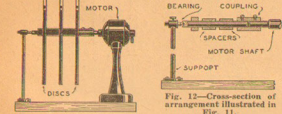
Discs in parallel, mounted on motor shaft extension.
